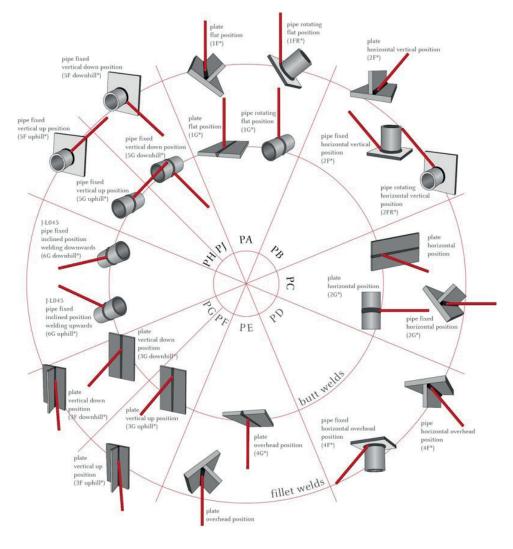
Welding positions according to DIN EN ISO 6947.
